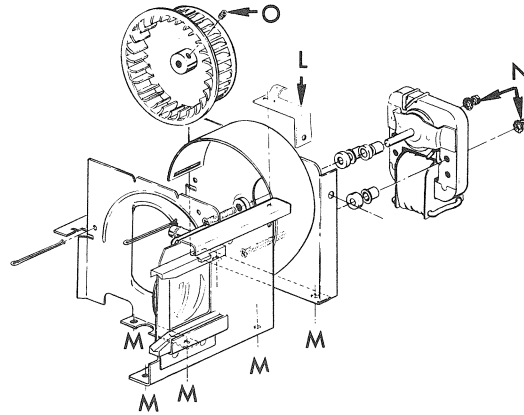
REMOVING FAN, MOTOR, AND APERTURE PLATE
